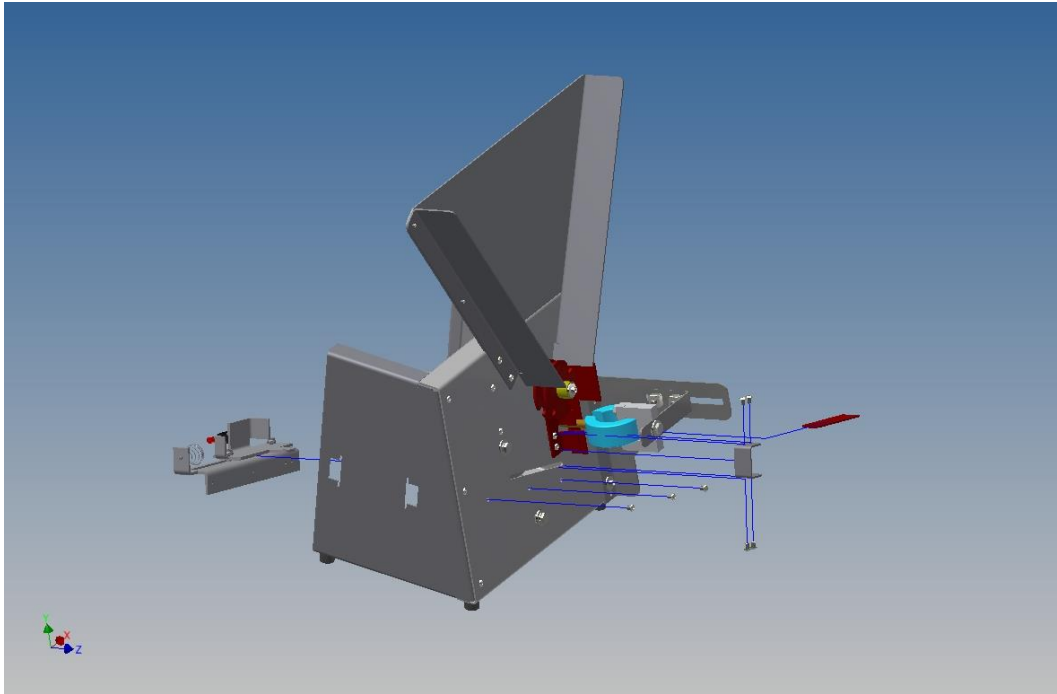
Front view showing rear mounting of new trolley and front mounting of new C shaped riser and trolley plate.
